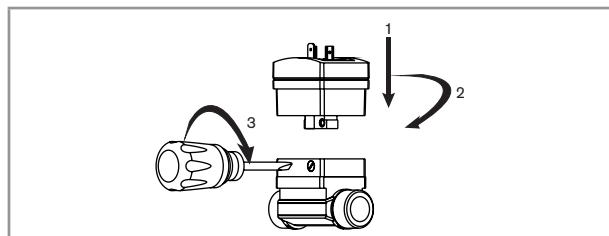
Mounting of the SE30 Ex onto an S030 fitting
